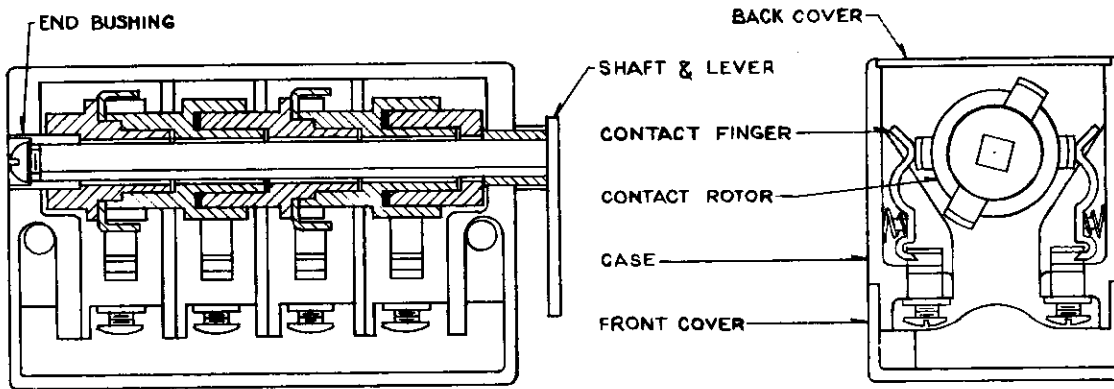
AUXILIARY SWITCH - CONSTRUCTION DETAILS
